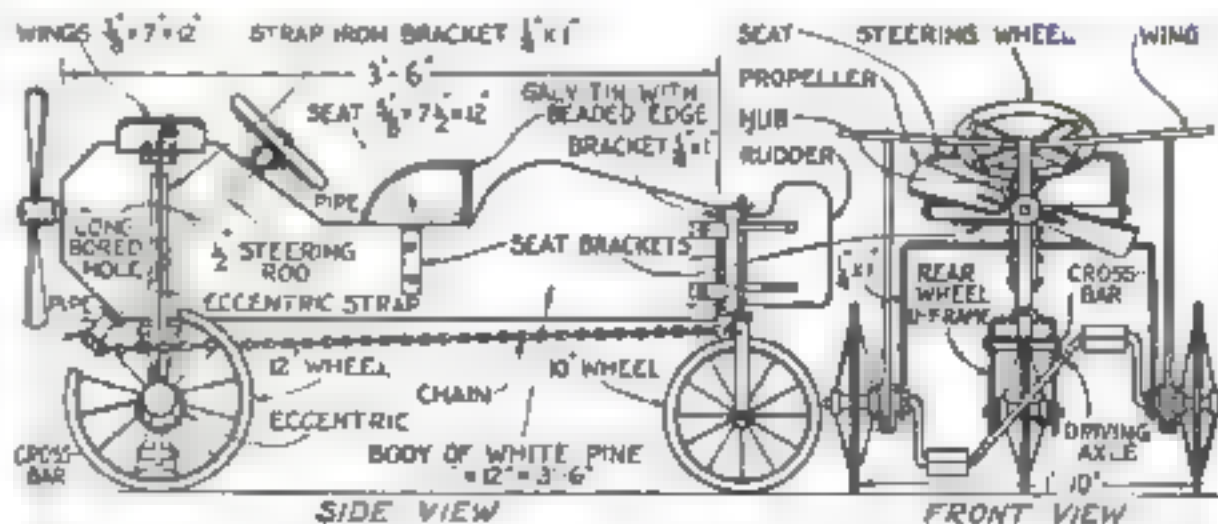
Side and front views of the auto plane with the dimensions followed by Mr. Dunn; these
